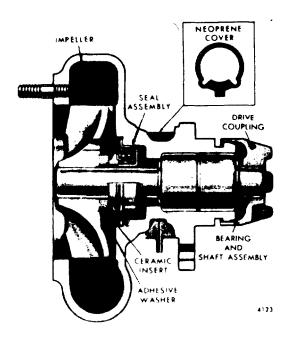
F-2. Water Pump With Ceramic Insert in Impeller
